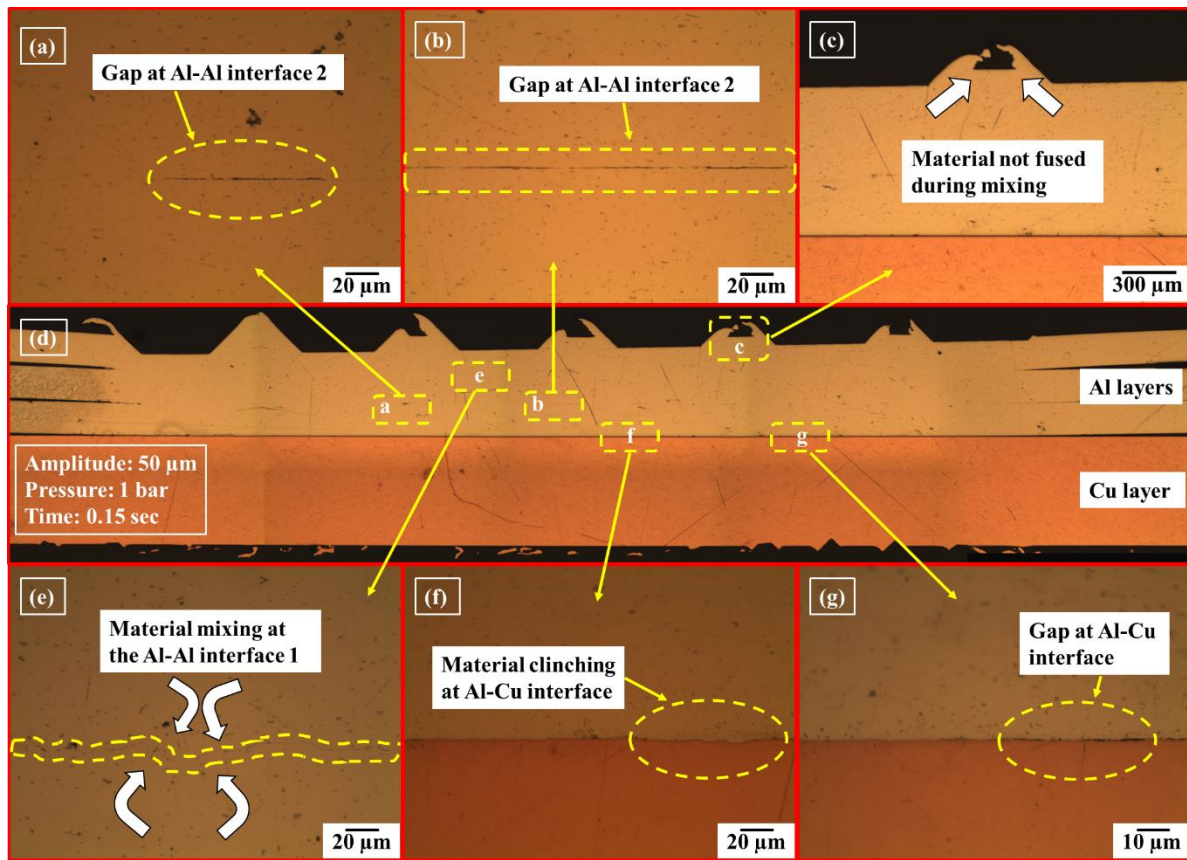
Optical micrograph of a typical under-weld joint showing the welding mechanism.
